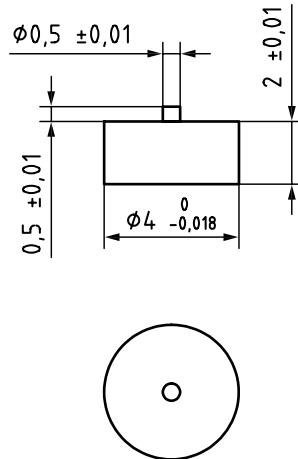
Cap used for the production of test-pieces used for the measurement of dimensional change during hardening
